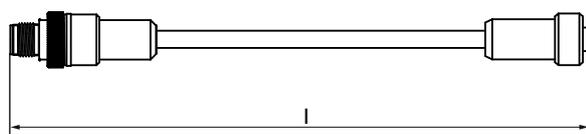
Connecting cable/extension cable M12 ↔ M12
